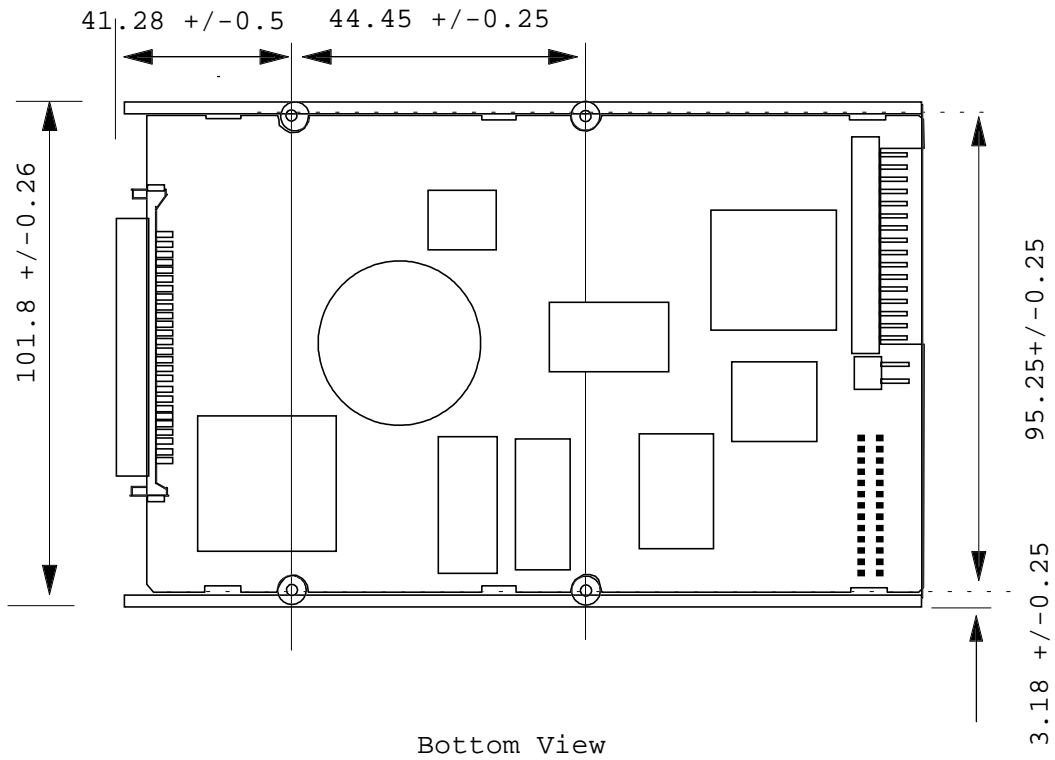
Location of bottom mounting holes (80 pin SCA-2 SCSI version)
